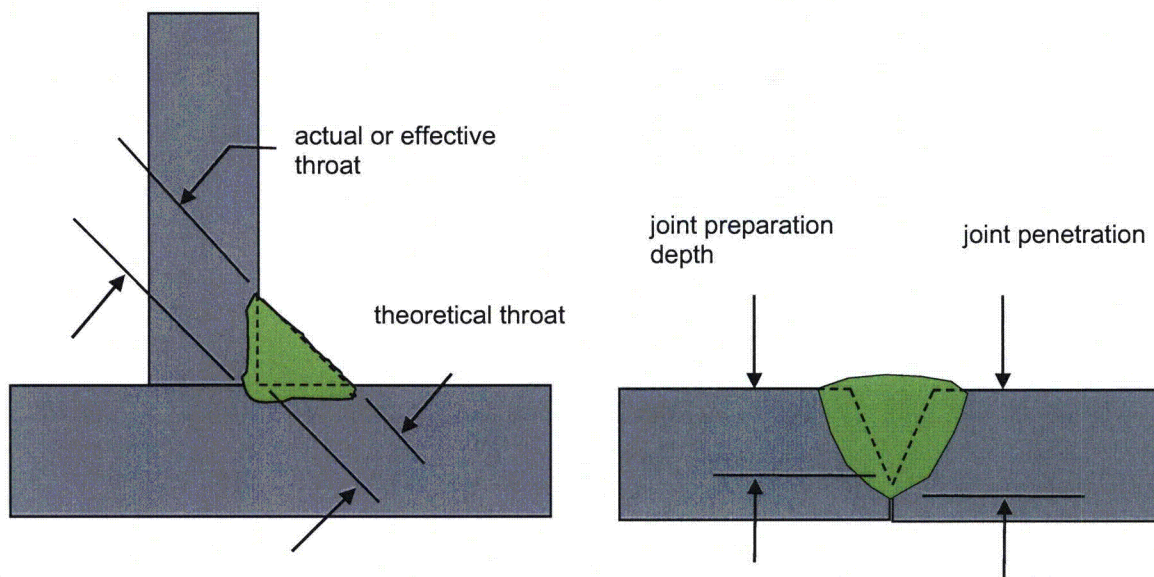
Fillet welded T-joint and partial penetration groove welded butt joint.
